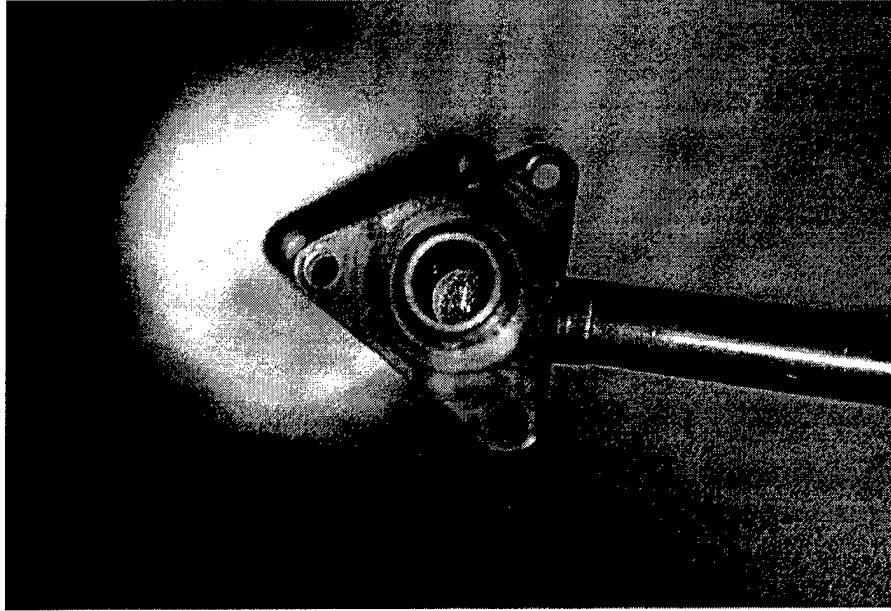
Actual Jet Engine Tube End Before Cleaning with Waterjet
